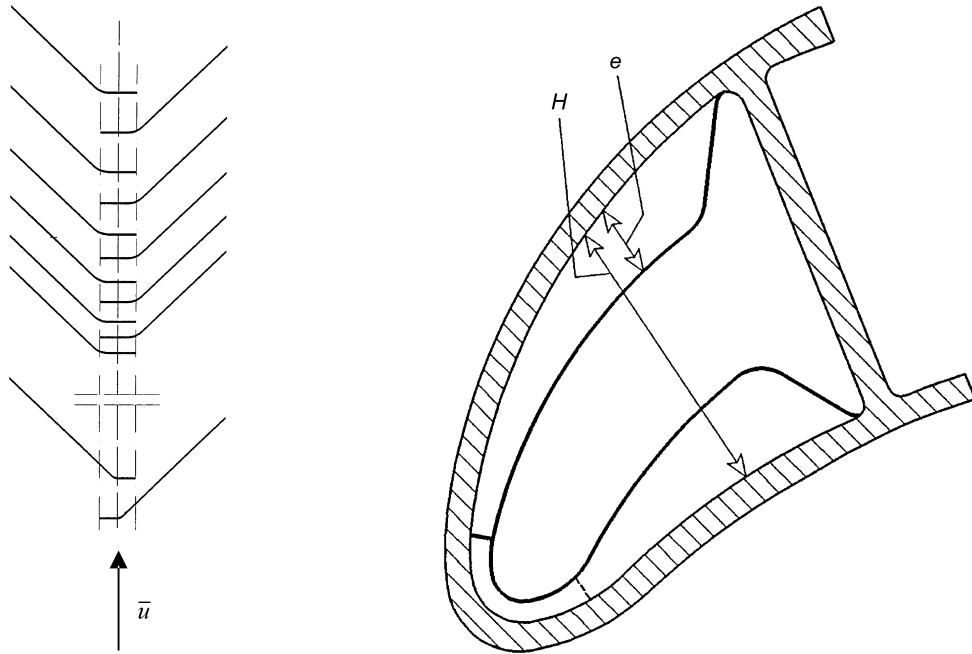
Three-dimensional turbulators for a leading edge cooling channel of an industrial gas turbine blade (from [14]).
